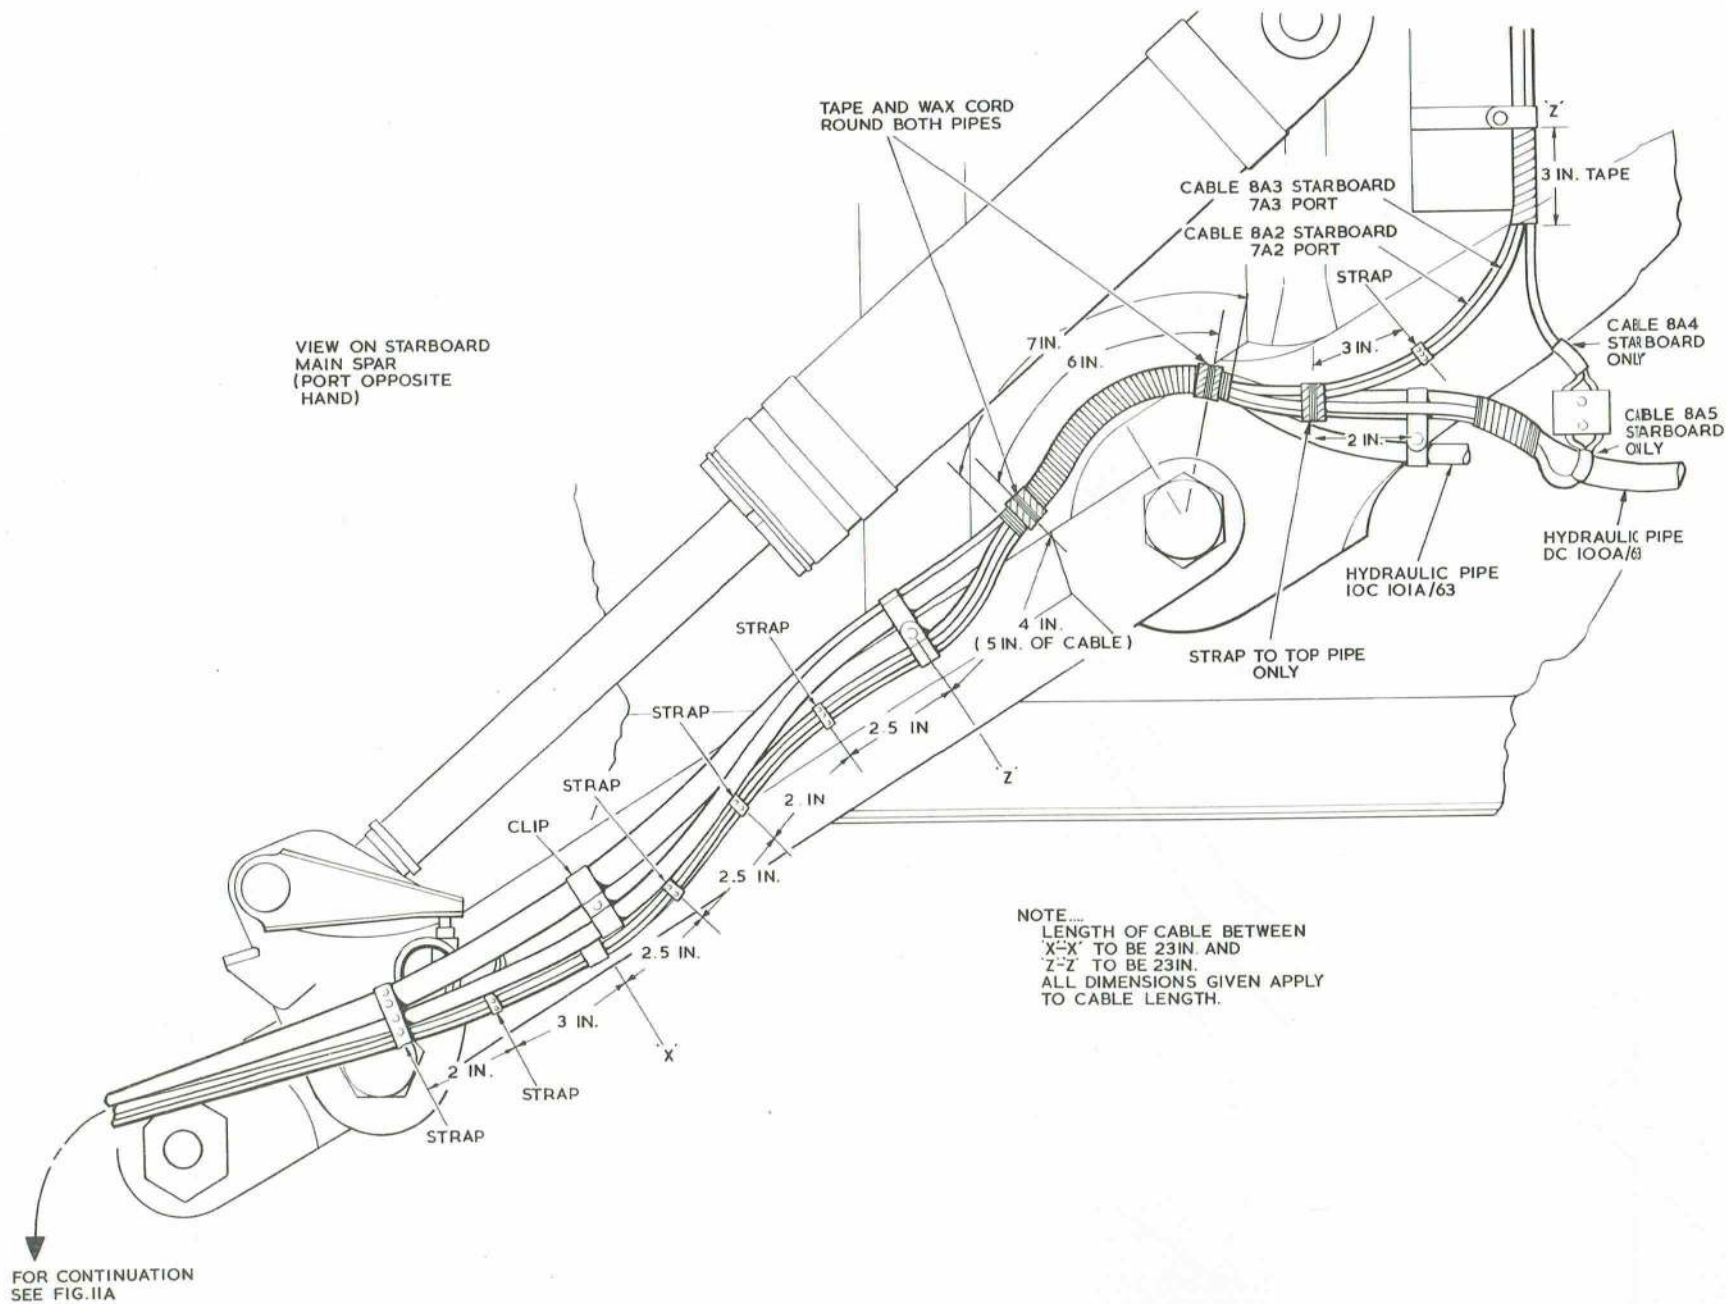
FIG.IIB. UNDERCARRIAGE - PIPING AND WIRING INSTALLATION
